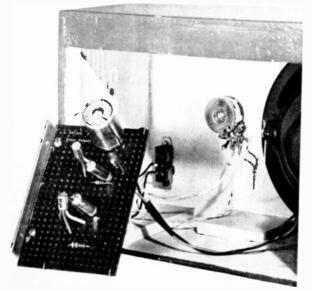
Layout and wiring of the components mounted on the Veroboard
